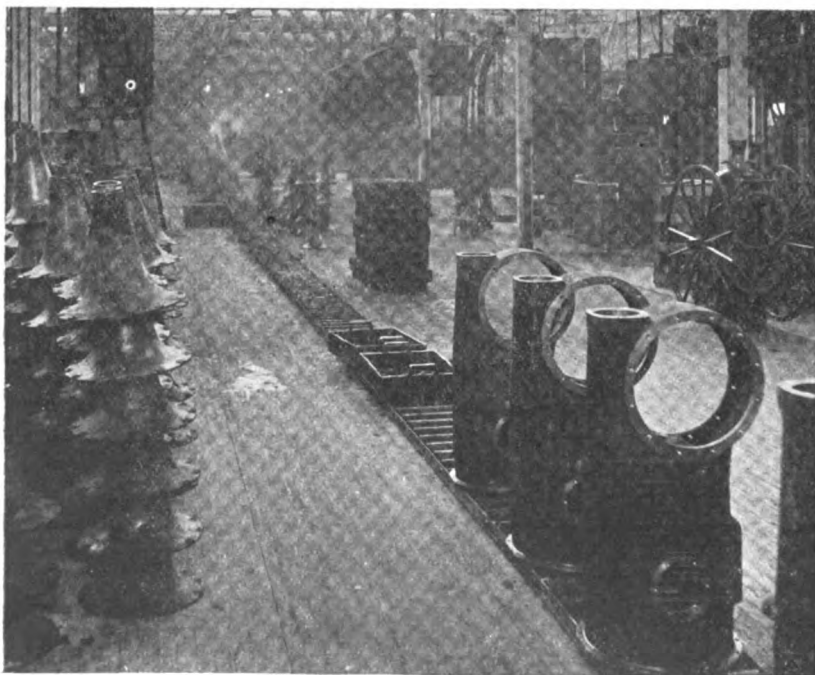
Looking backward toward the washing machine, showing the incline down which the parts slide to the beginning of the transmission assembly track
